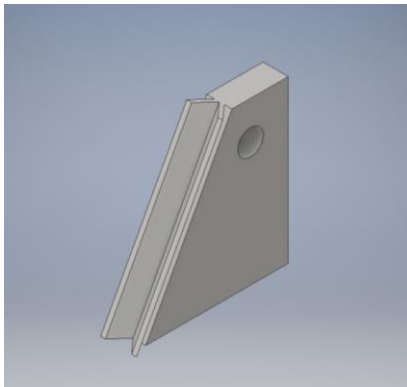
CAD Drawing of Drill Bit Sharpening Jig.
